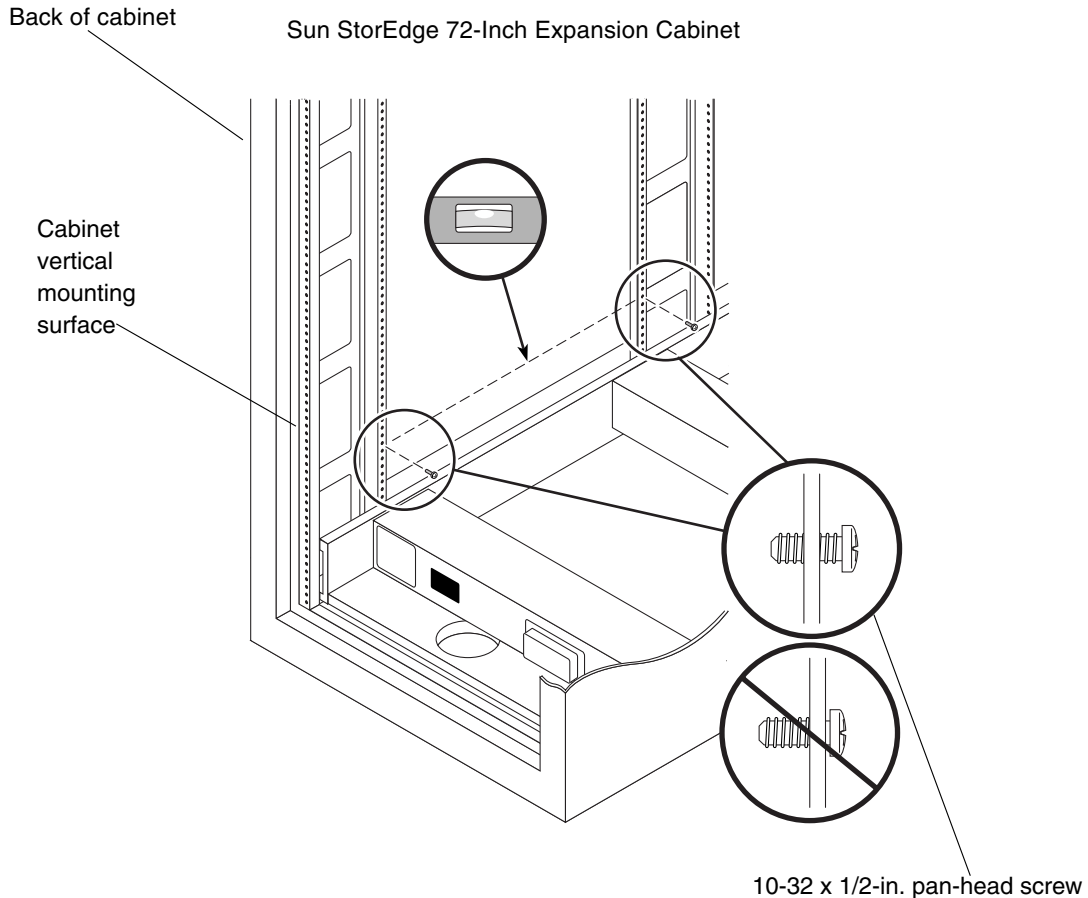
Mounting Rail Assembly (One of Two) for the Cabinets
